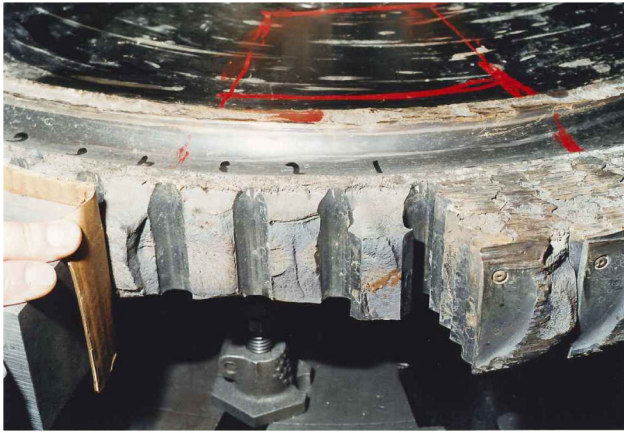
Photograph of Failed First Stage Disk Illustrating Fractured and Intact Disk Tenons.
